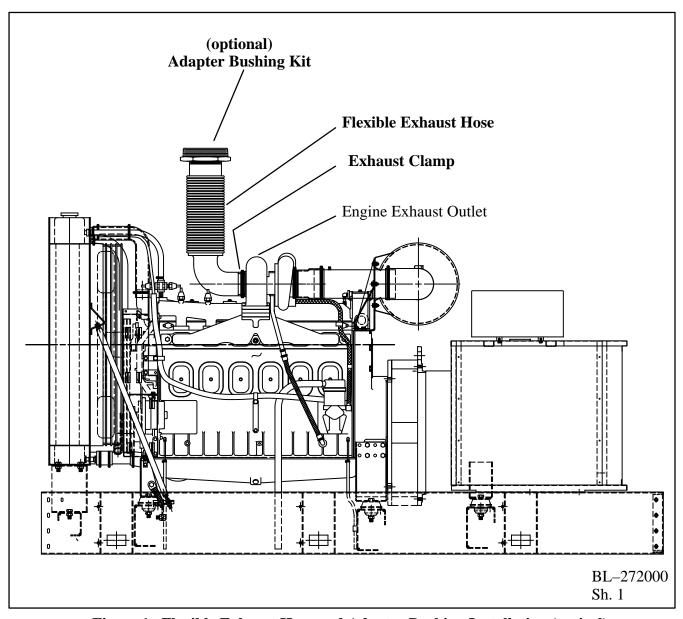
Flexible Exhaust Hose and Adapter Bushing Installation (typical)
